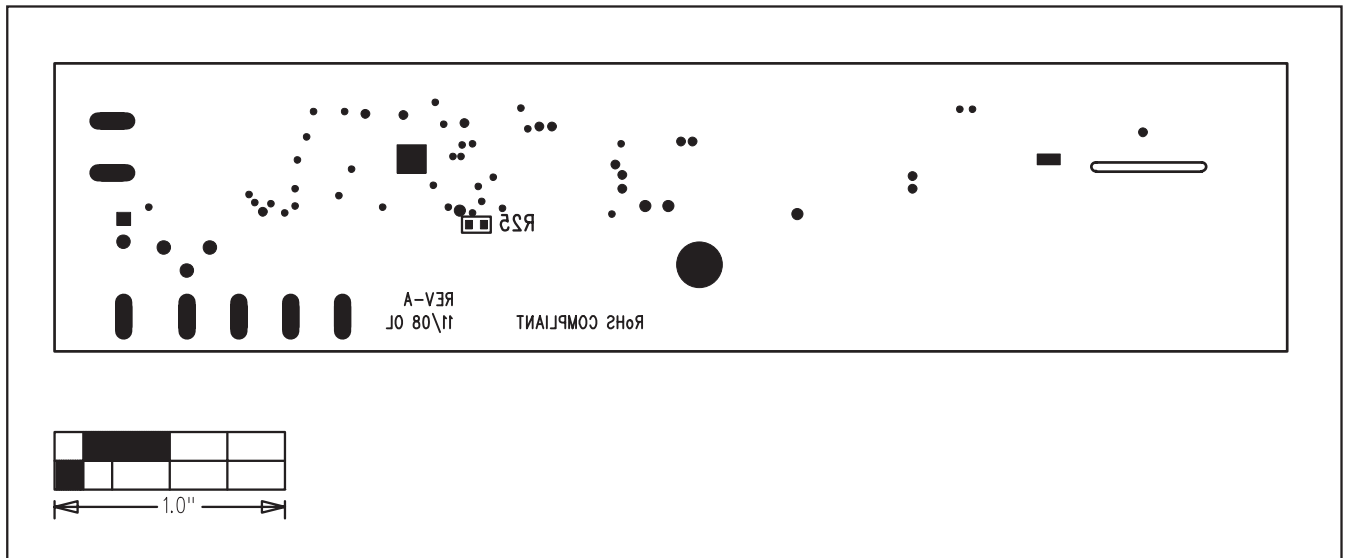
MAX8785A EV Kit Component Placement Guide—Solder Side
